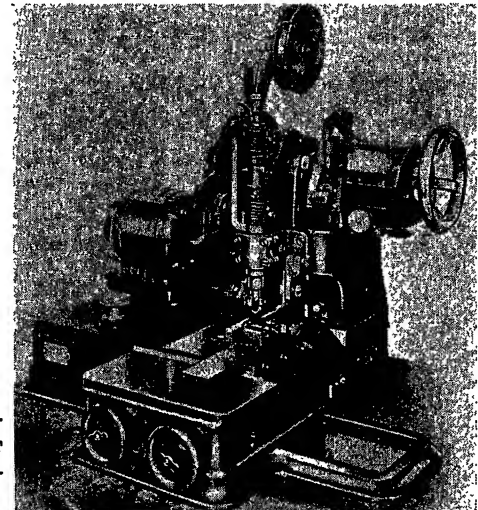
SEMI-AUTOMATIC POINT CONTACT WELDING MACHINE
